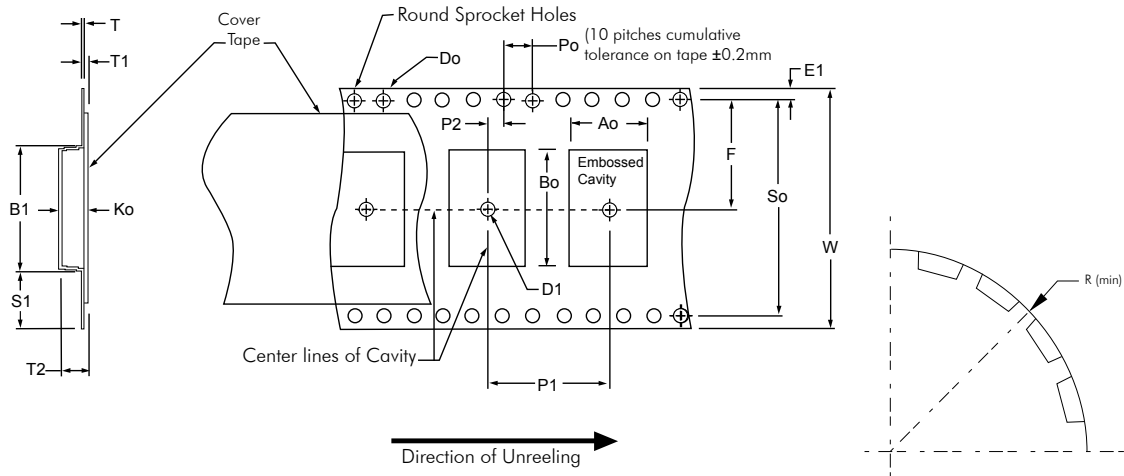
Standard Embossed Carrier Tape Dimensions
